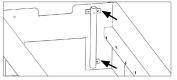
Figure F: Align outer flanges on receiver with existing holes in Reformer frame, and secure with a flat washer and nylock nut.
